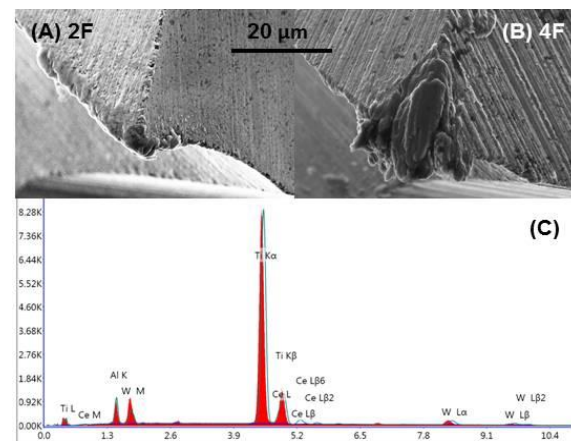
Adhesion of the workpiece material to the cutting edge, EDS spot analysis confirming the workpiece material
